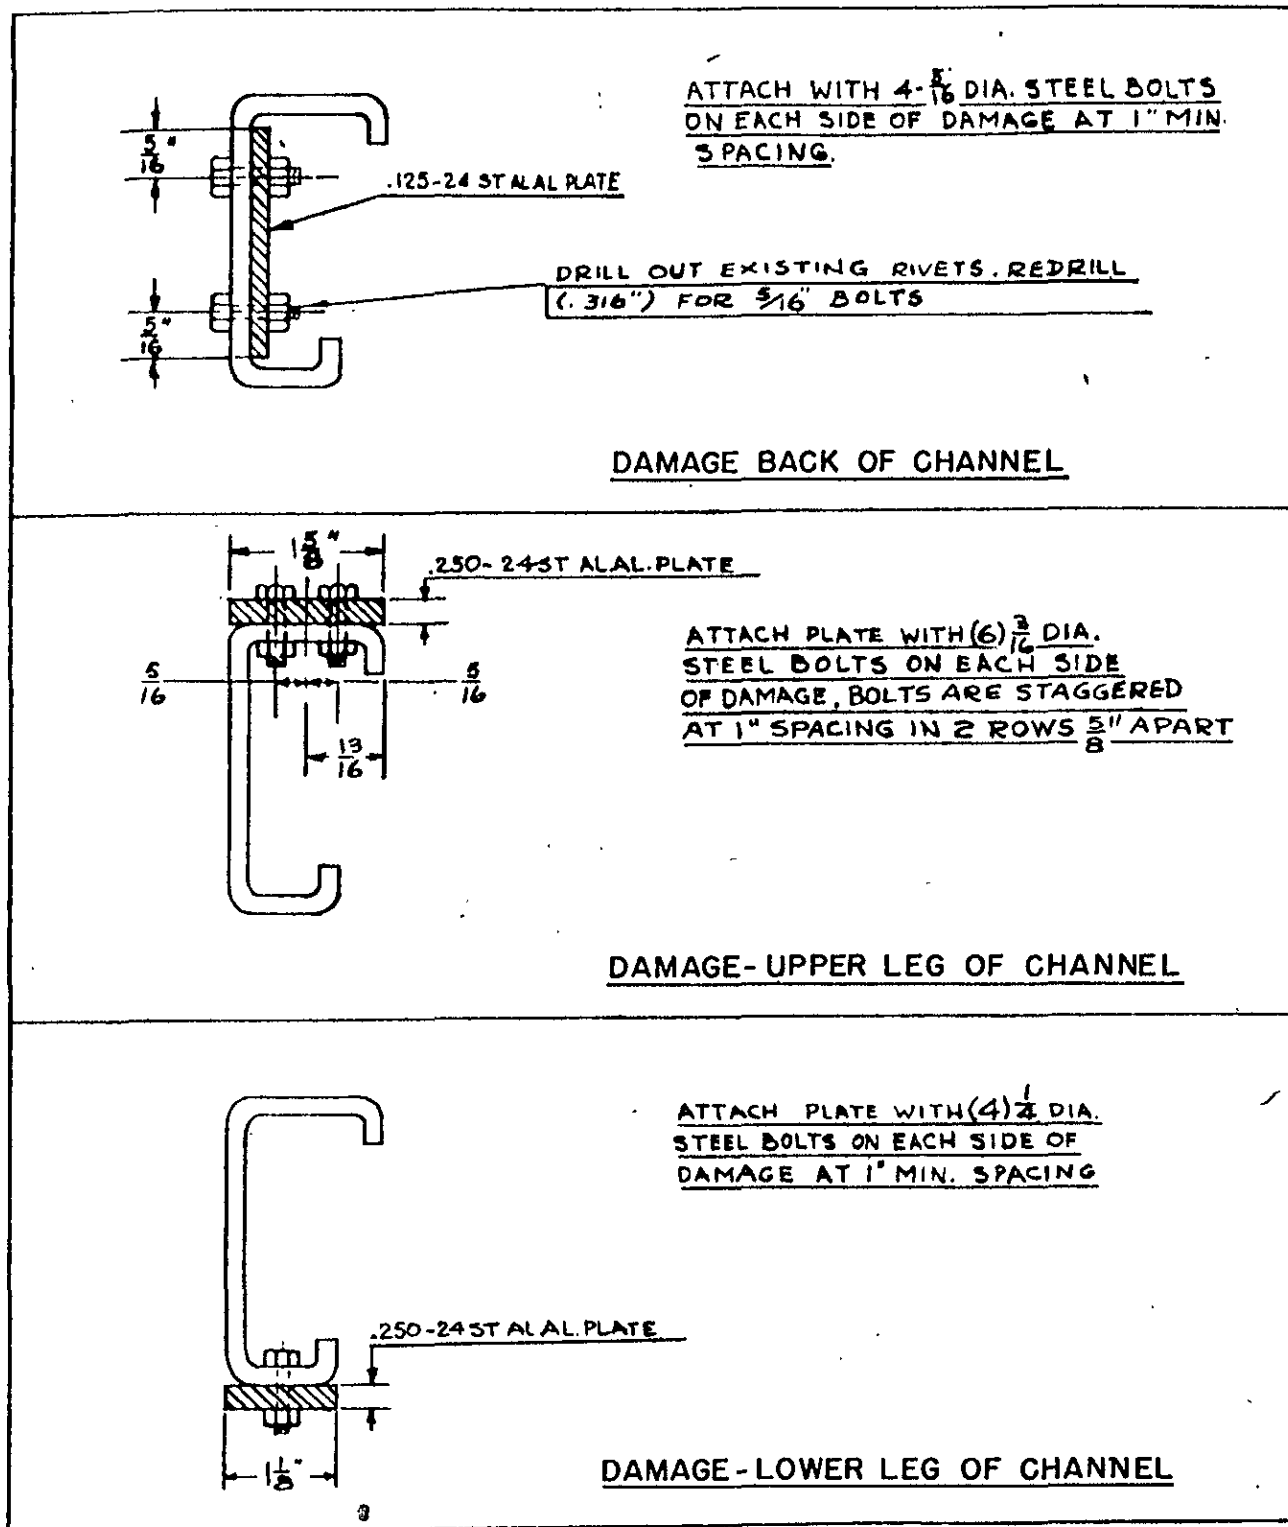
Minor Repairs - Lower Channel Fire Wall
